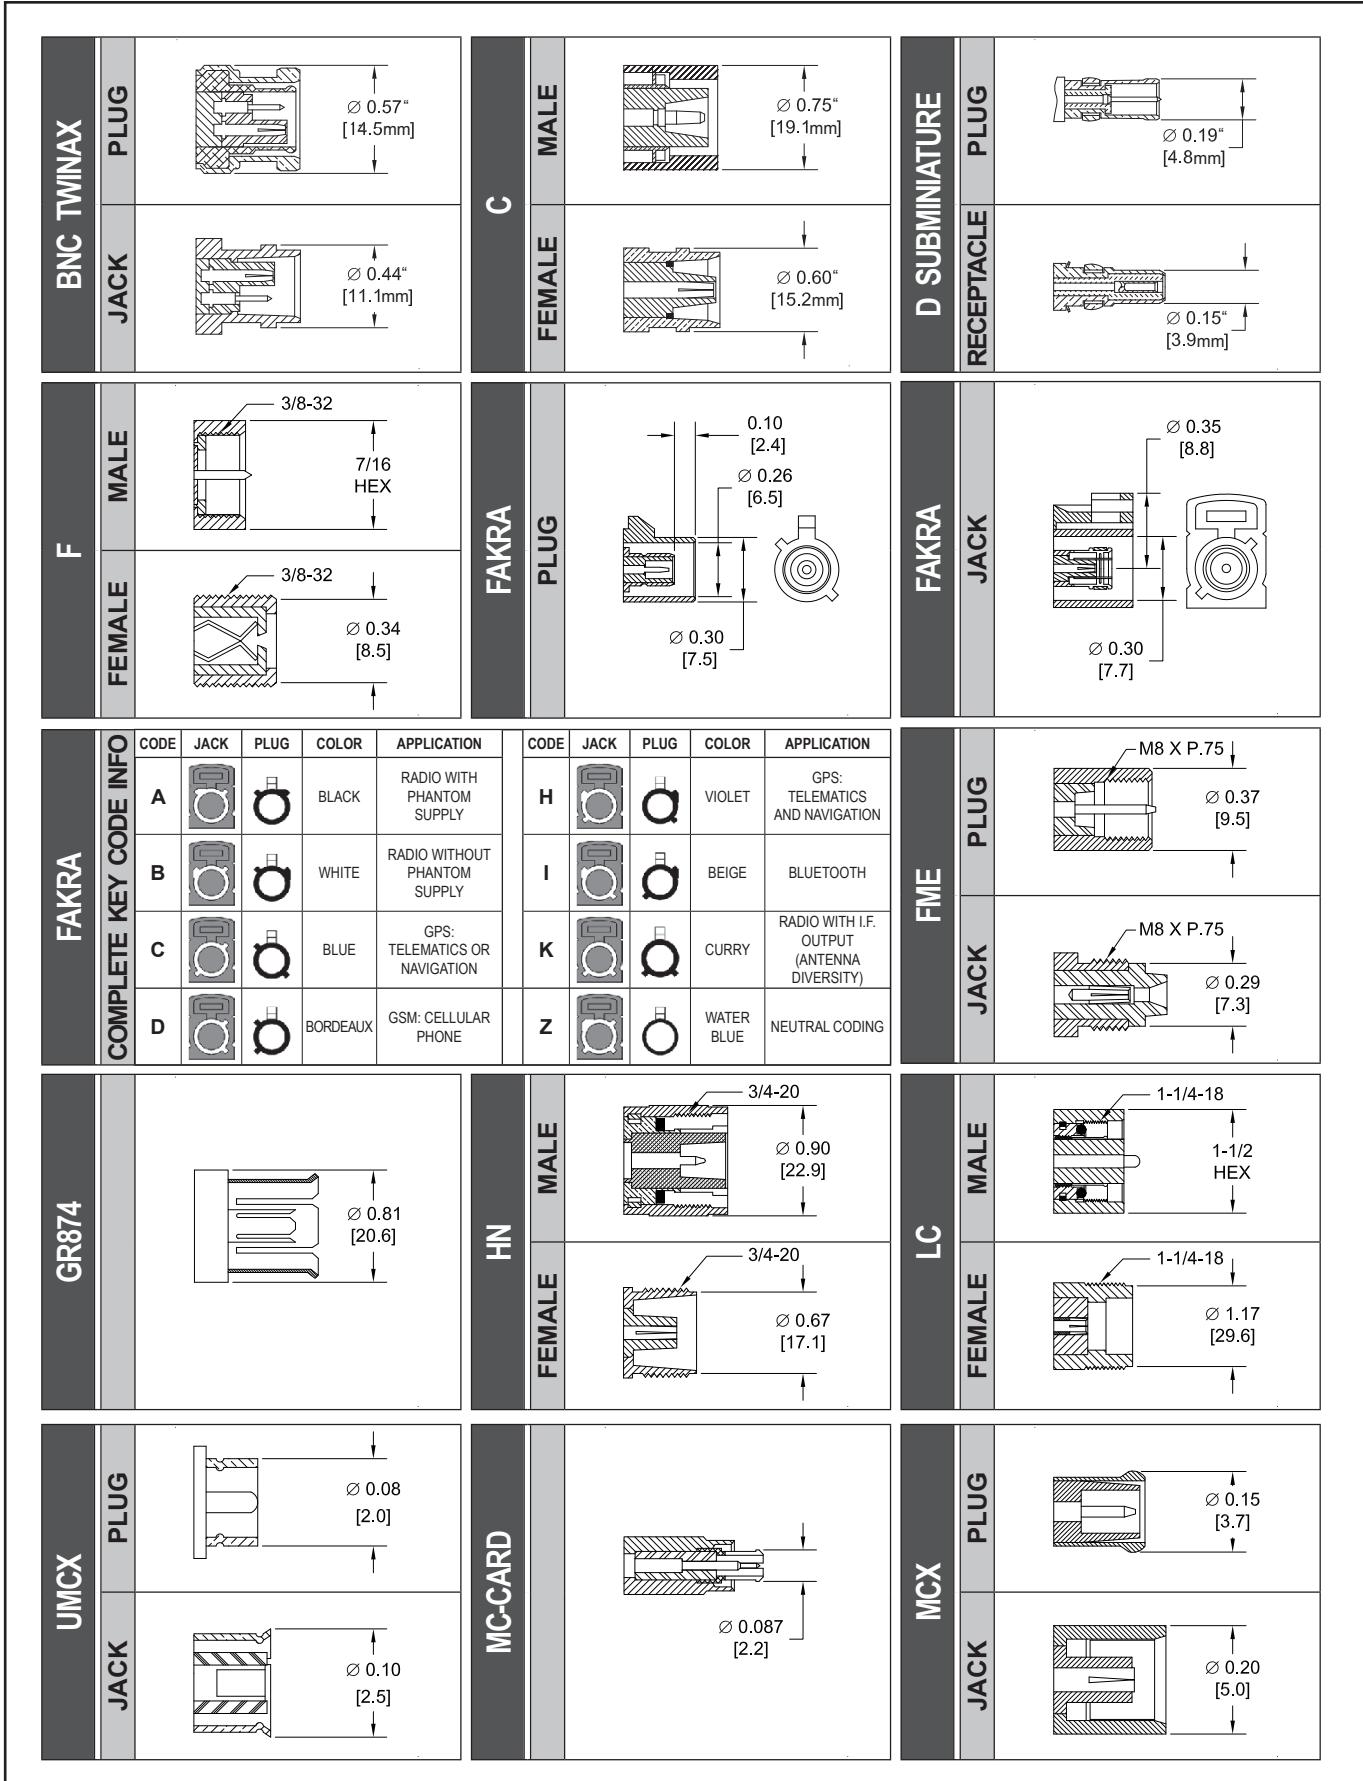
B — Connector side views, set 2 of 4. [Courtesy of Pasternak]
